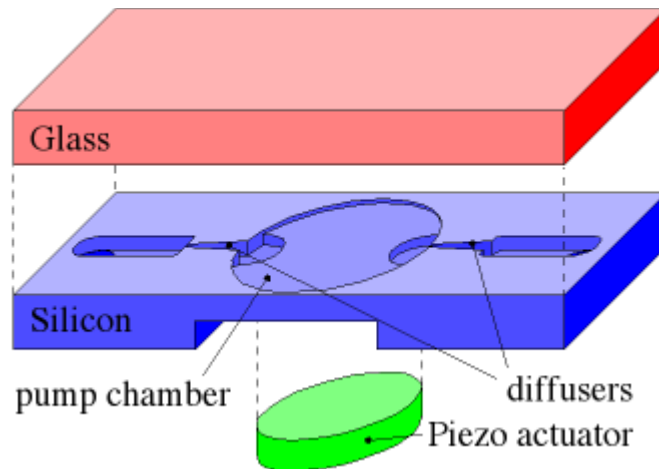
Exploded view of the diffuser Micro pump, taken from Wijngaart, 2000.
